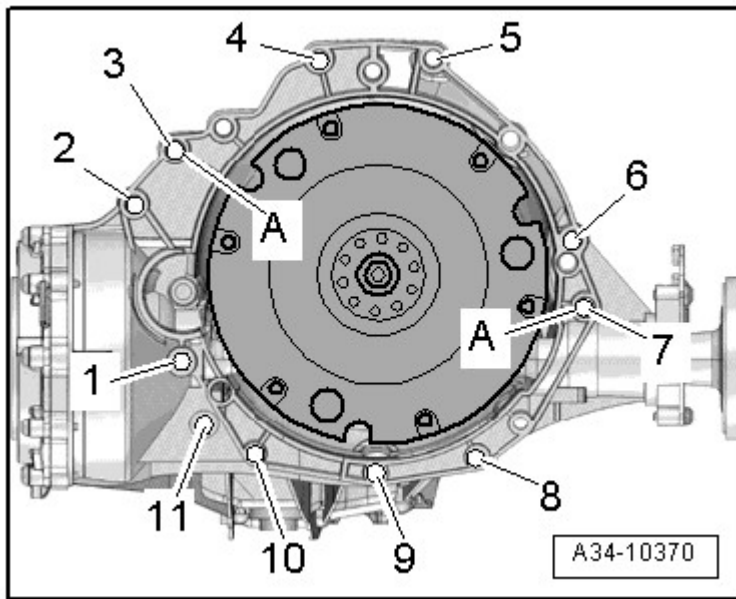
Checking If Alignment Sleeves -A- For Centering Engine/Transmission Are In Cylinder Block
